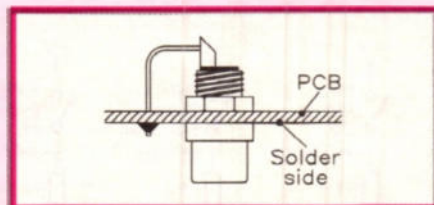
How to mount the phono sockets onto the PSU/Input PCB.
